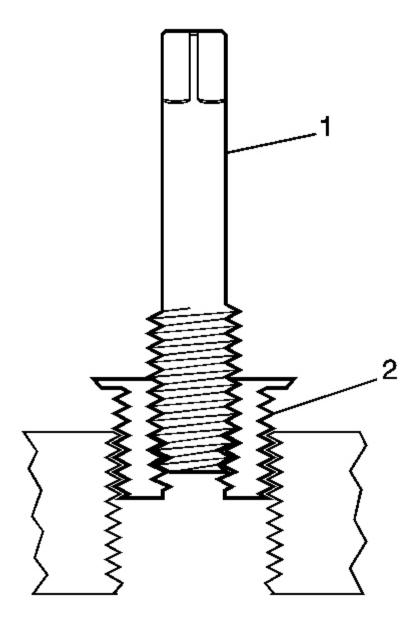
Installing Insert - Tapered Thread Courtesy of GENERAL MOTORS CORP.
